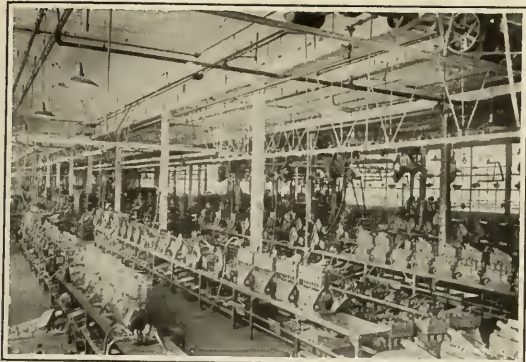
Overhead conveyors are used in the motor assembling department of the Willys-Overland Co., Toledo, Ohio, for carrying the larger parts of the motors to the assembling benches. Small parts are held in New Britain tote boxes underneath the benches, where they are within convenient reach of the operator
